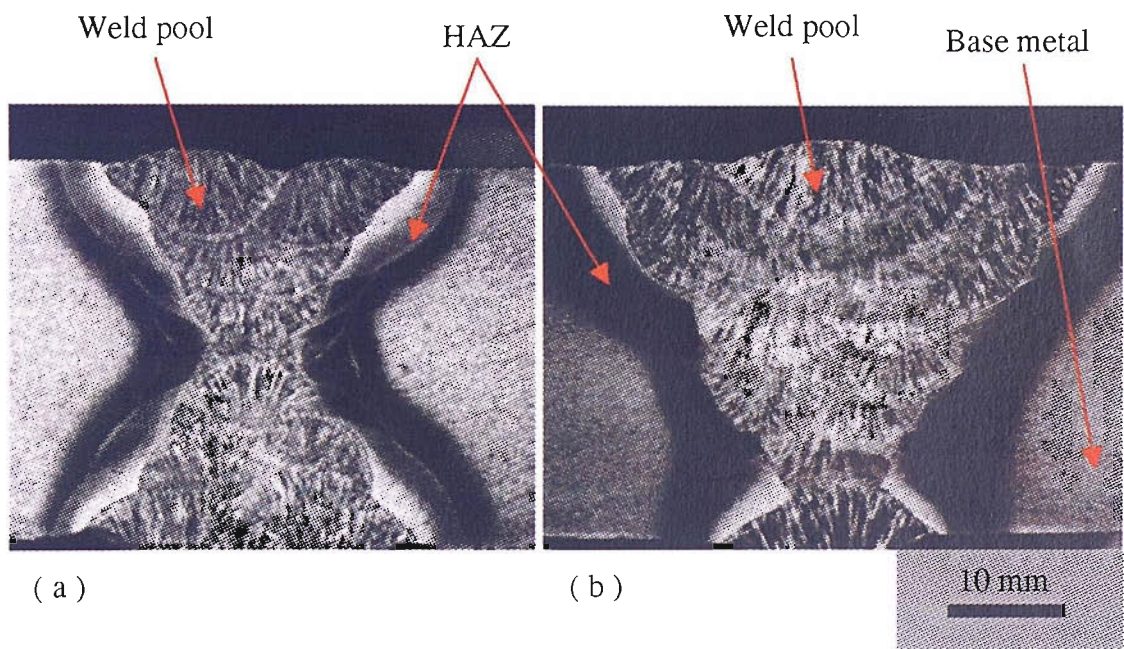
Manual metal arc welds of (a) a double V-butt weld and (b) a single V-butt weld in a constructional steel. The weld pool, HAZ, and the base metal are identified.[9].
